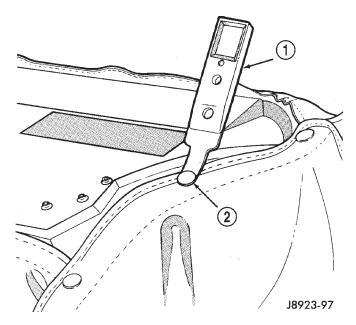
Seat Cushion Cover Retaining Clip Removal
